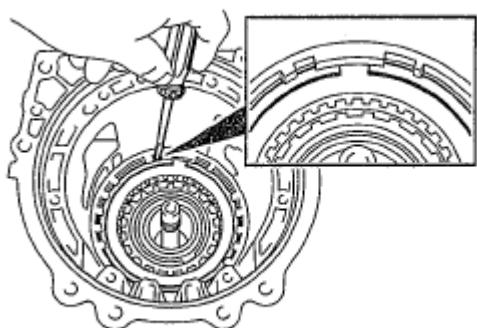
Identifying Thrust Washer And F2 One-Way Clutch Component On Clutch Drum Component
